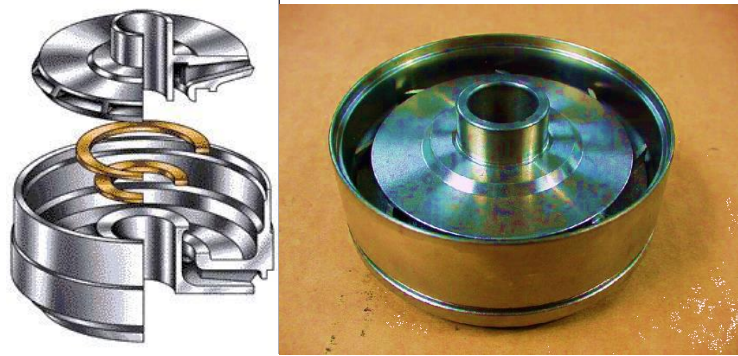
8-9 showing (right) the fluid entering the impeller through the "eye" near the shaft and exits the impeller at the outer diameter (OD) Diffuser (in blue) diverts the fluid into the next impeller, other picture (left) showing a cross section view of a real ESP.
